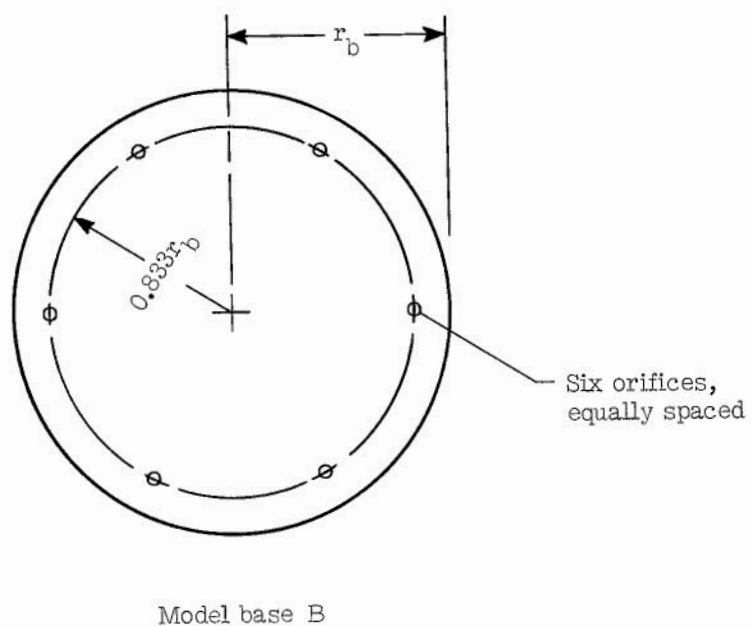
Model drawings and dimensions. ($d_b = 2r_b = 3$ in. (7.62 cm).)
